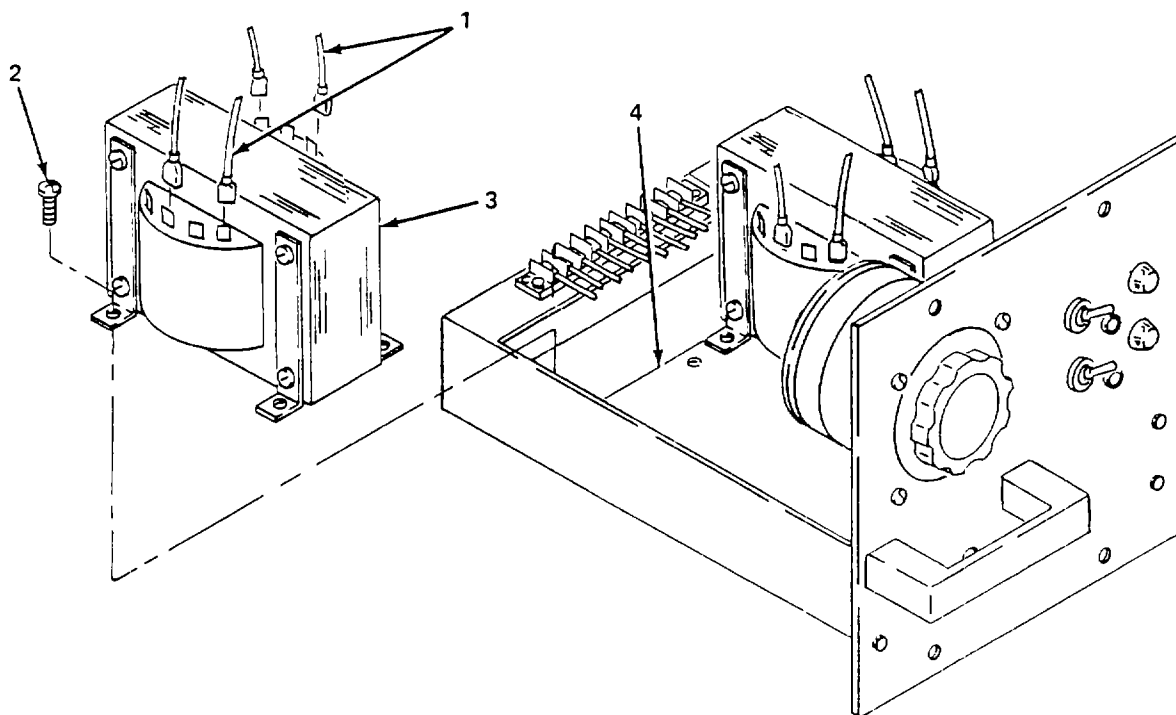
Double Light Power Supply (Inner Lock) Transformer, Replace.
